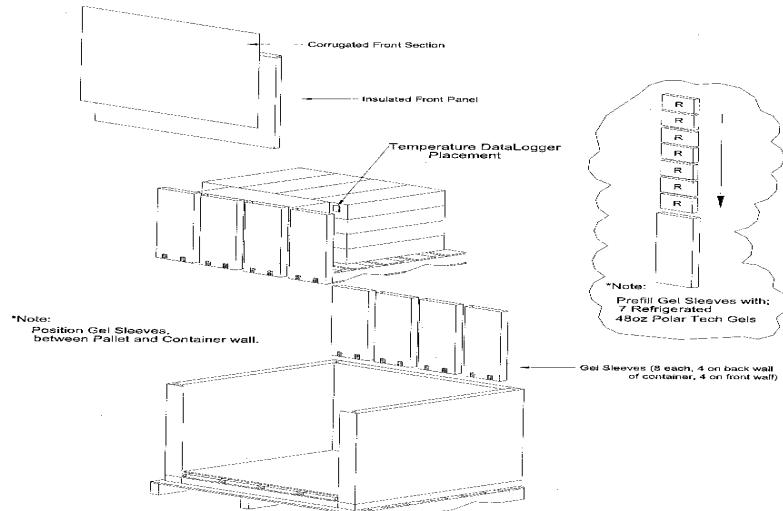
Gel Sleeve, Product Pallet, Front Wall Assembly
